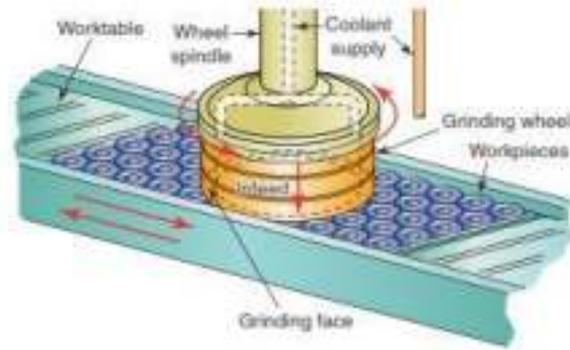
Principle of the type II surface grinder, which has a vertical spindle and a reciprocating table.
